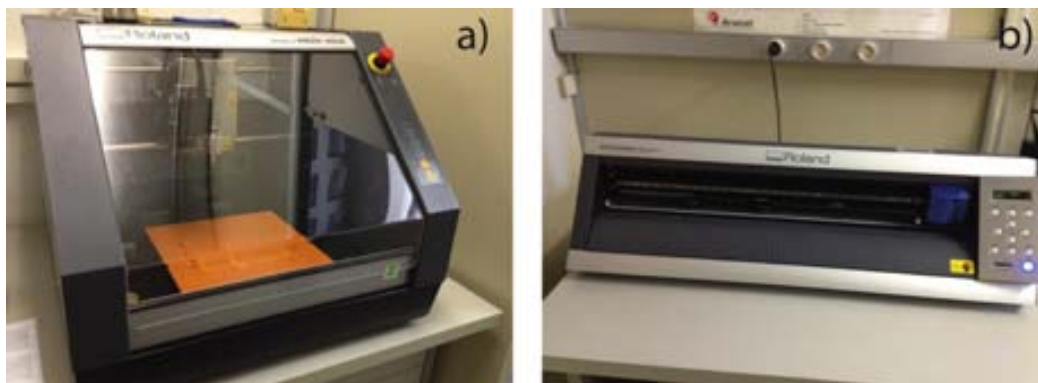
Rapid - prototyping equipment used in this thesis, a) Milling machine, b) and cutter plotter.
